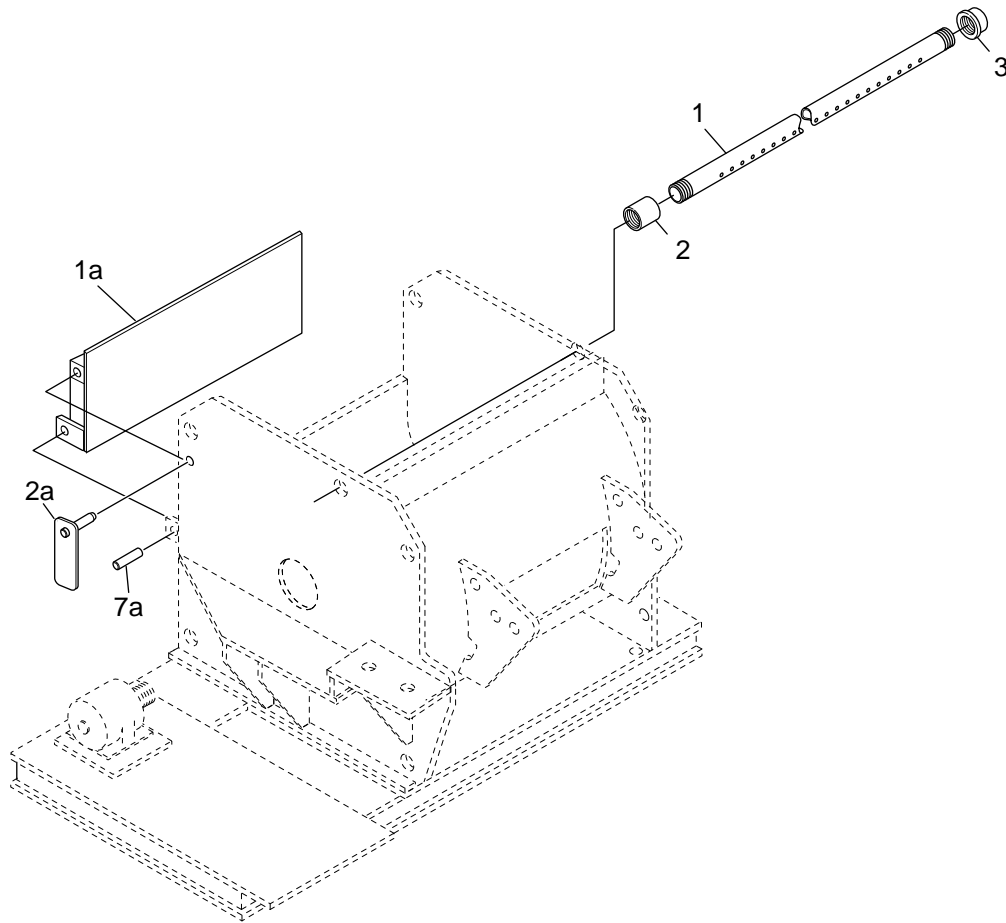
Motor Accessories – Water Pipe – Front Panel Assemblies (#021555 and #237819)
